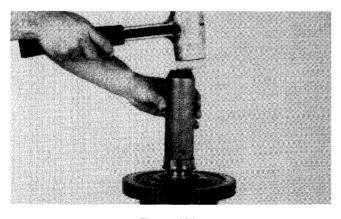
Install clutch shaft front bearing inner race with large diameter of race down.
